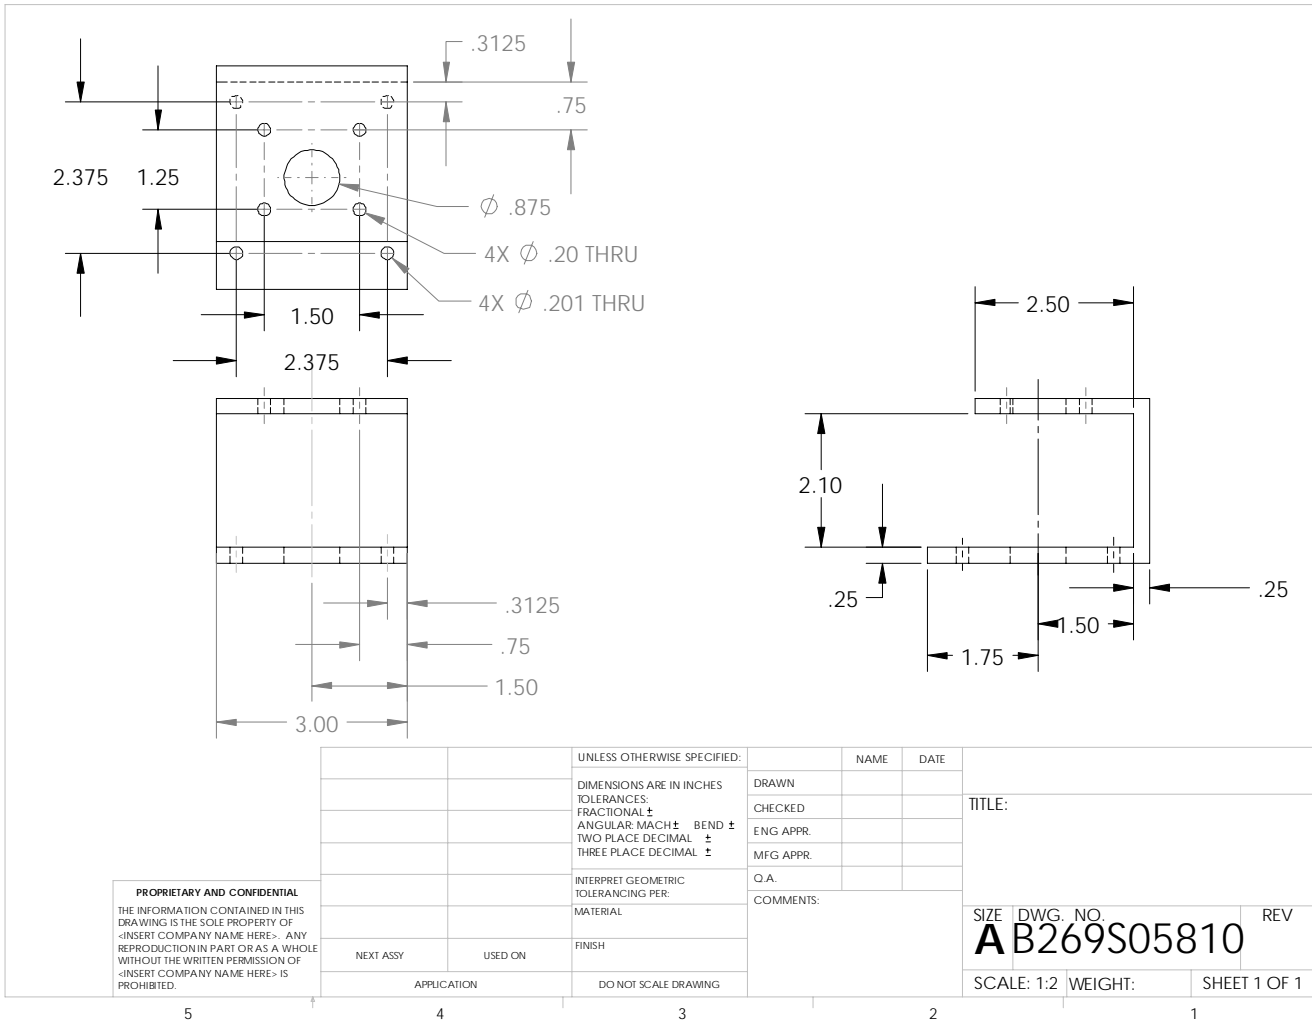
Detail drawing: Valve/Actuator mounting plate
